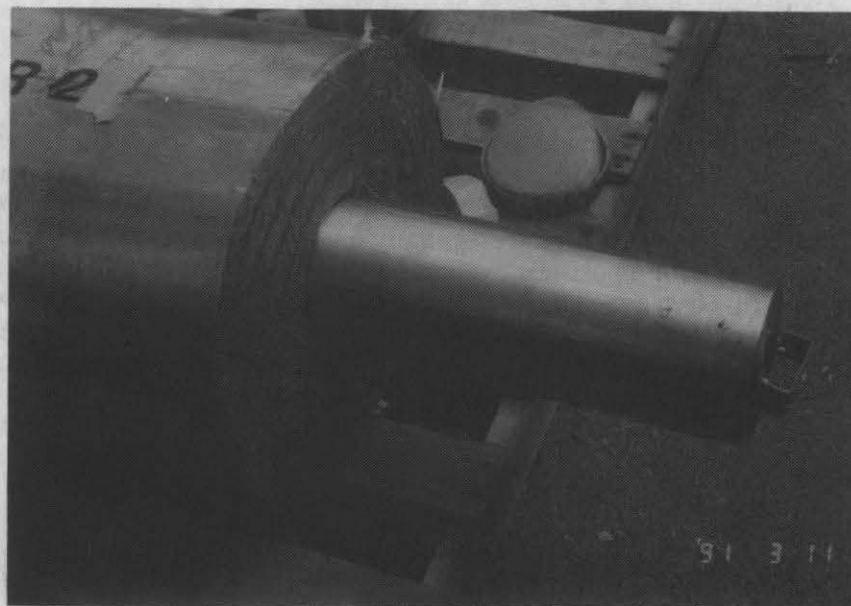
Cutaway of Prototype Package Following Side-On Dynamic Crush Test
